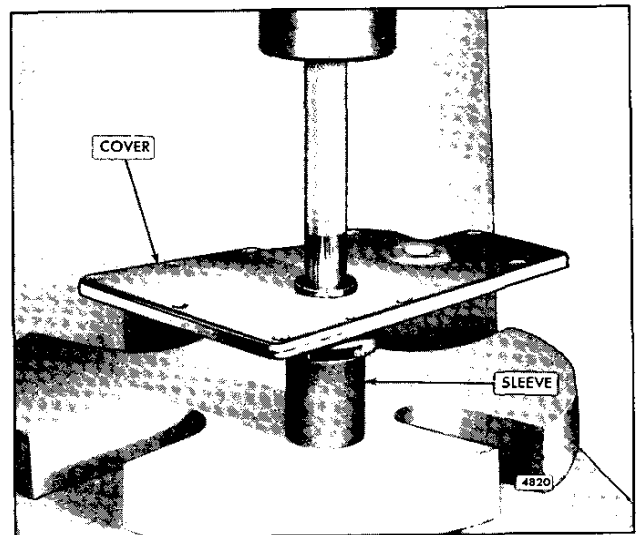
Removing Stop Lever Shaft Bushing from Governor Cover Using Tool J 21967-01
